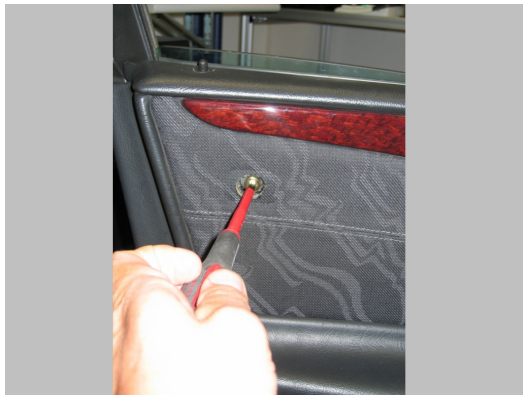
Step 7: the screw below the SRS clip must be unscrewed and removed. (photography by Clemens Günther)
